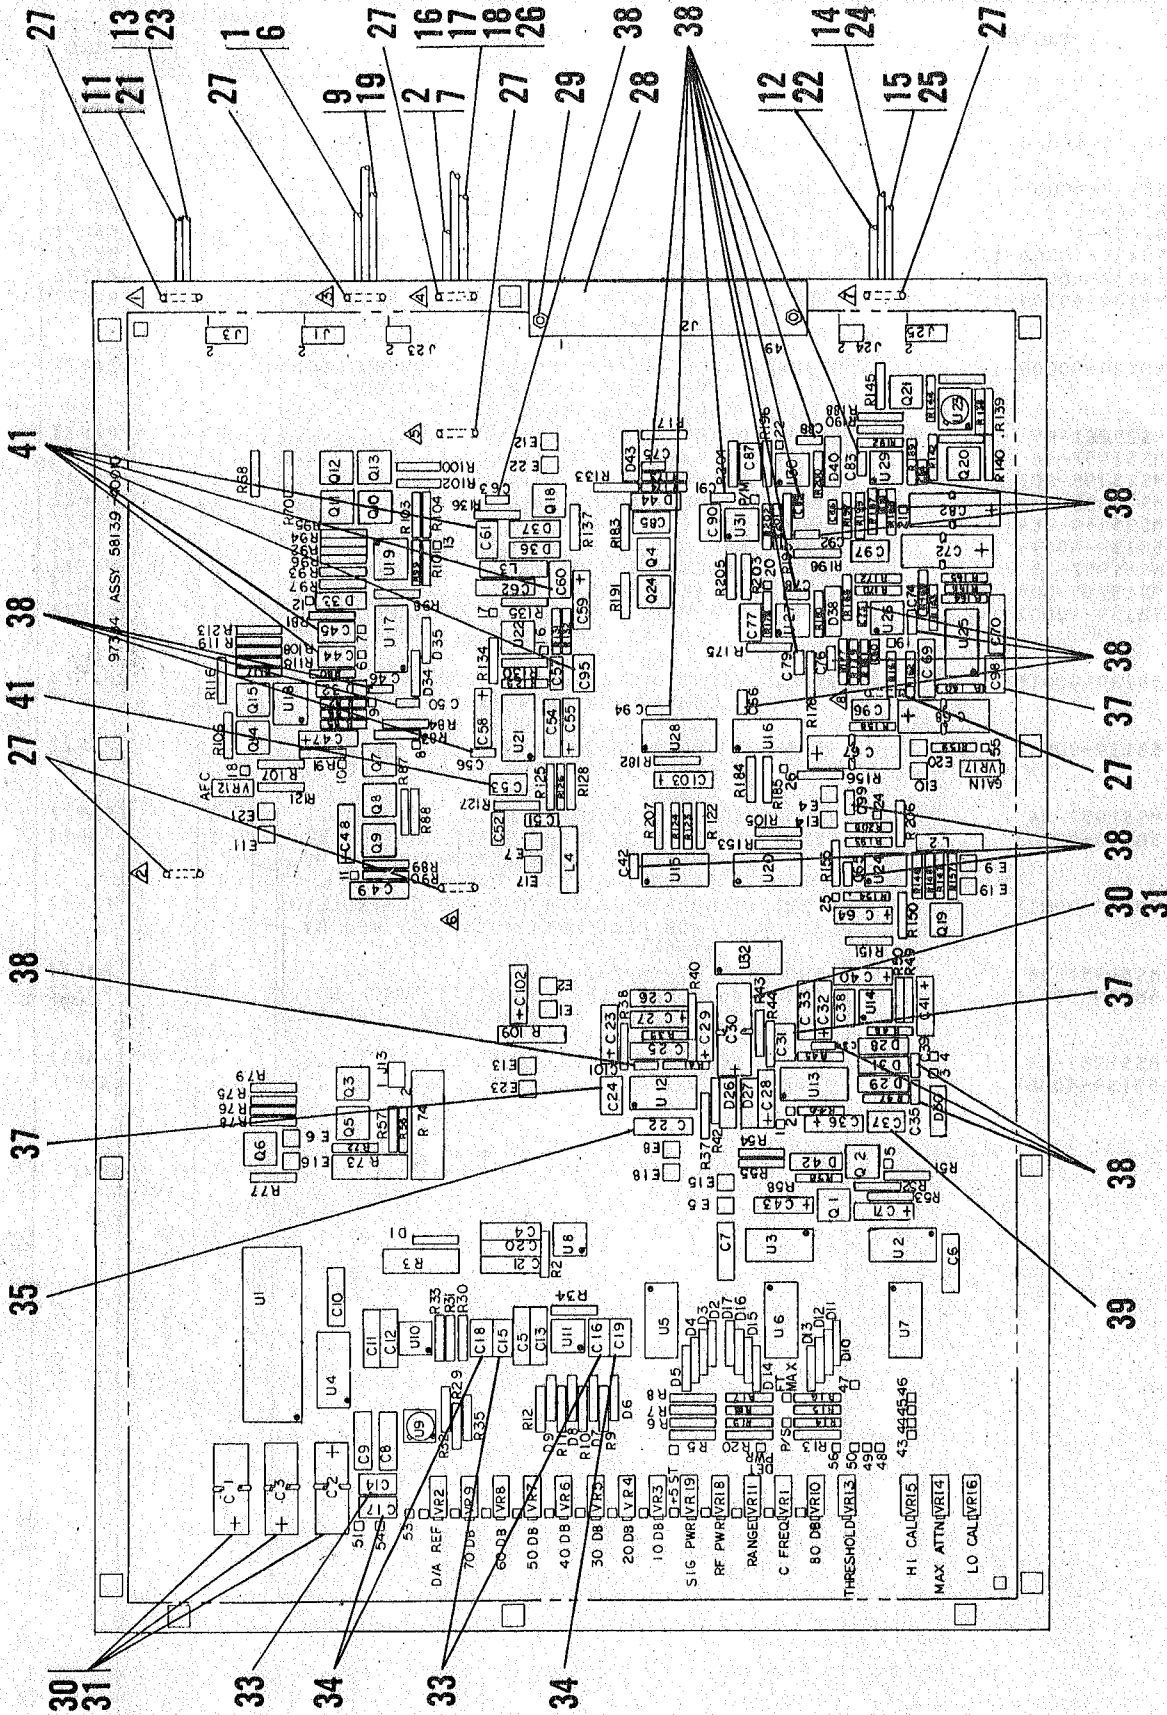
Circuit Card Assembly, Microwave Interface (Sheet 1 of 7)
